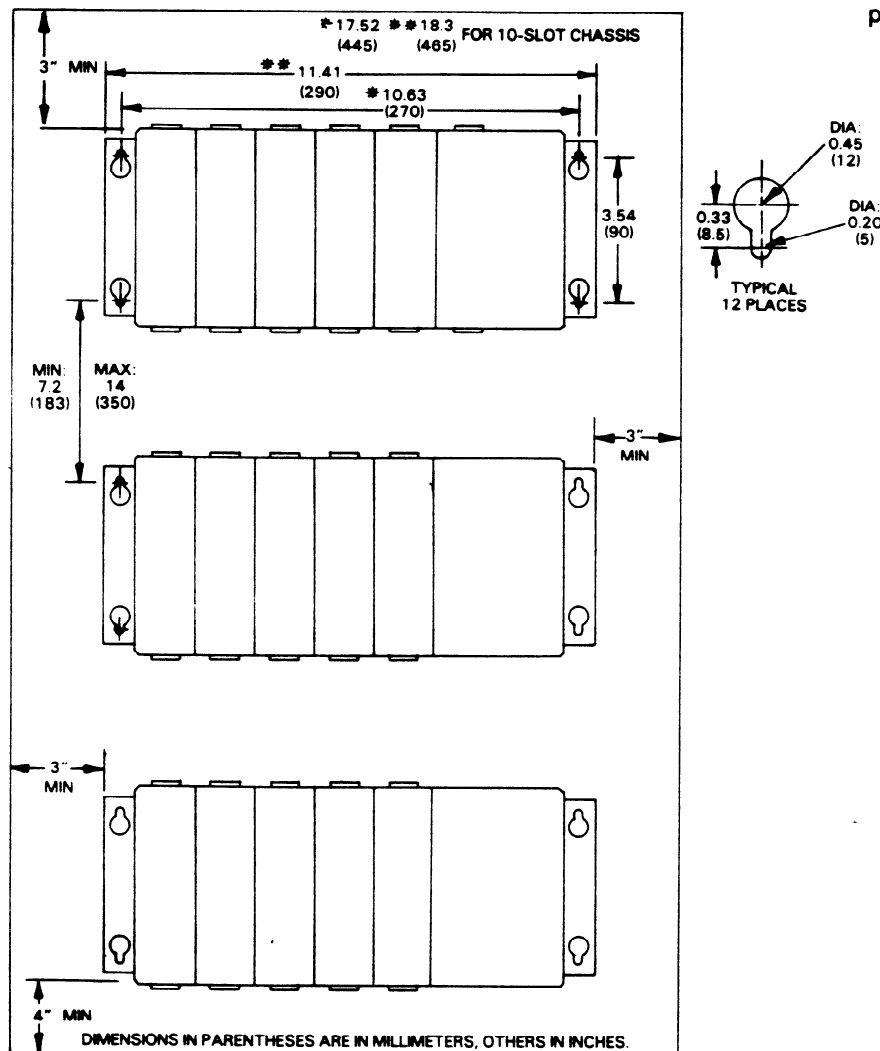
Rack Mounting Dimensions for Proper Heat Dissipation
